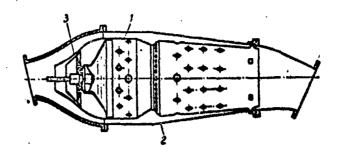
Combustion chamber of TRD (turbojet engine) with blade swirl chamber. 1) Flame tube; 2) outer chamber; 3) fuel-nozzle ferrule.
